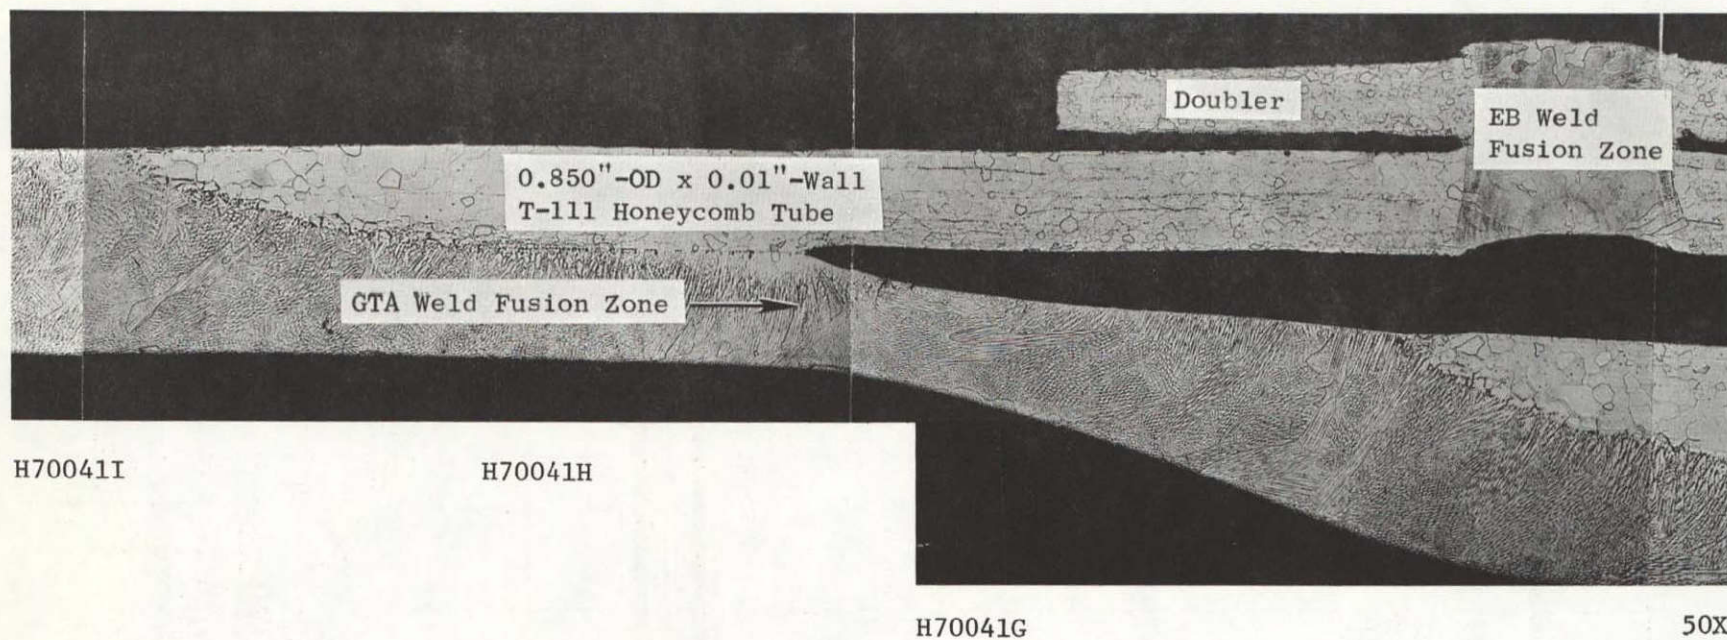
Microstructure Through GTA Tube-to-Tube T-111 Welded Tube Pair at Doubler Location Showing Transverse View of Doubler EB Weld and Longitudinal View of GTA Weld. Etchant: NH_4F , HNO_3 , H_2O
